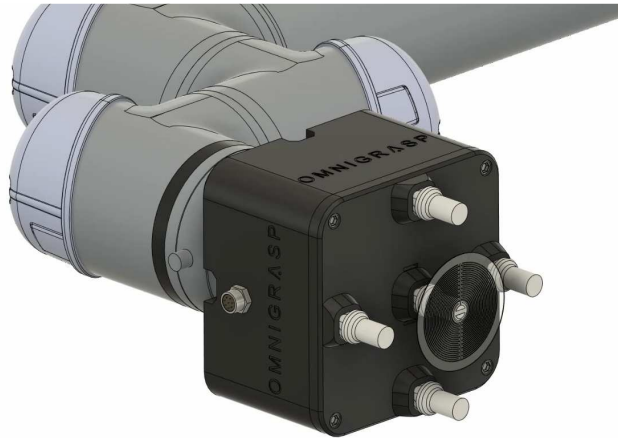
OMNIGRASP EA gripper V2 prototype: CAD view of the gripping side
